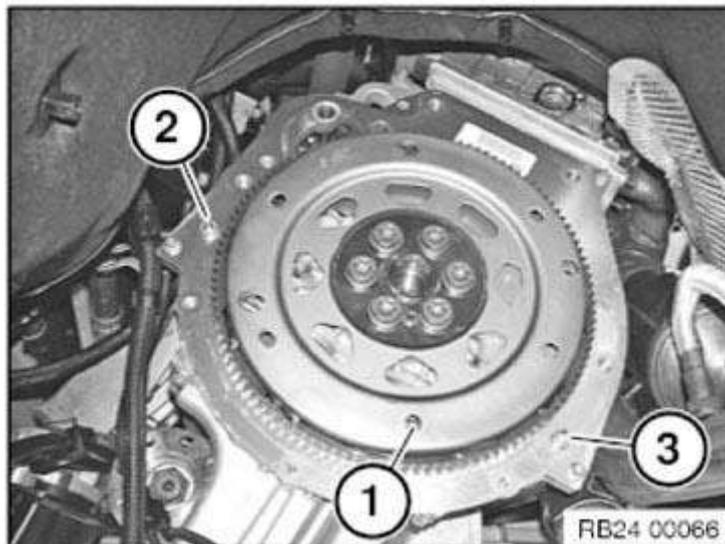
Identifying Fitting Sleeves And Driving Plate Bore Hole
